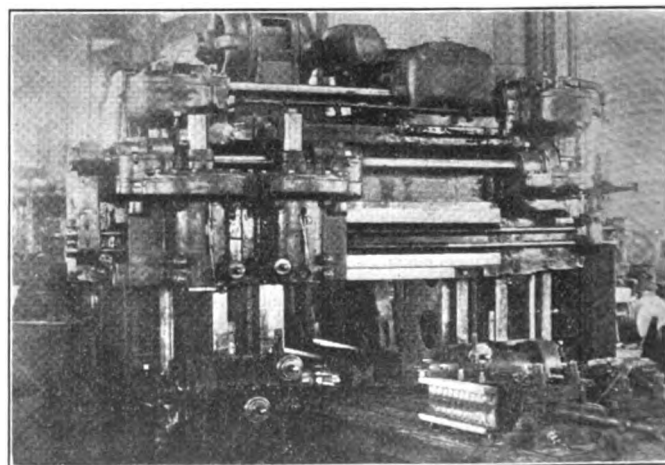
Milling the guide bar fit on a herringbone type of crosshead
